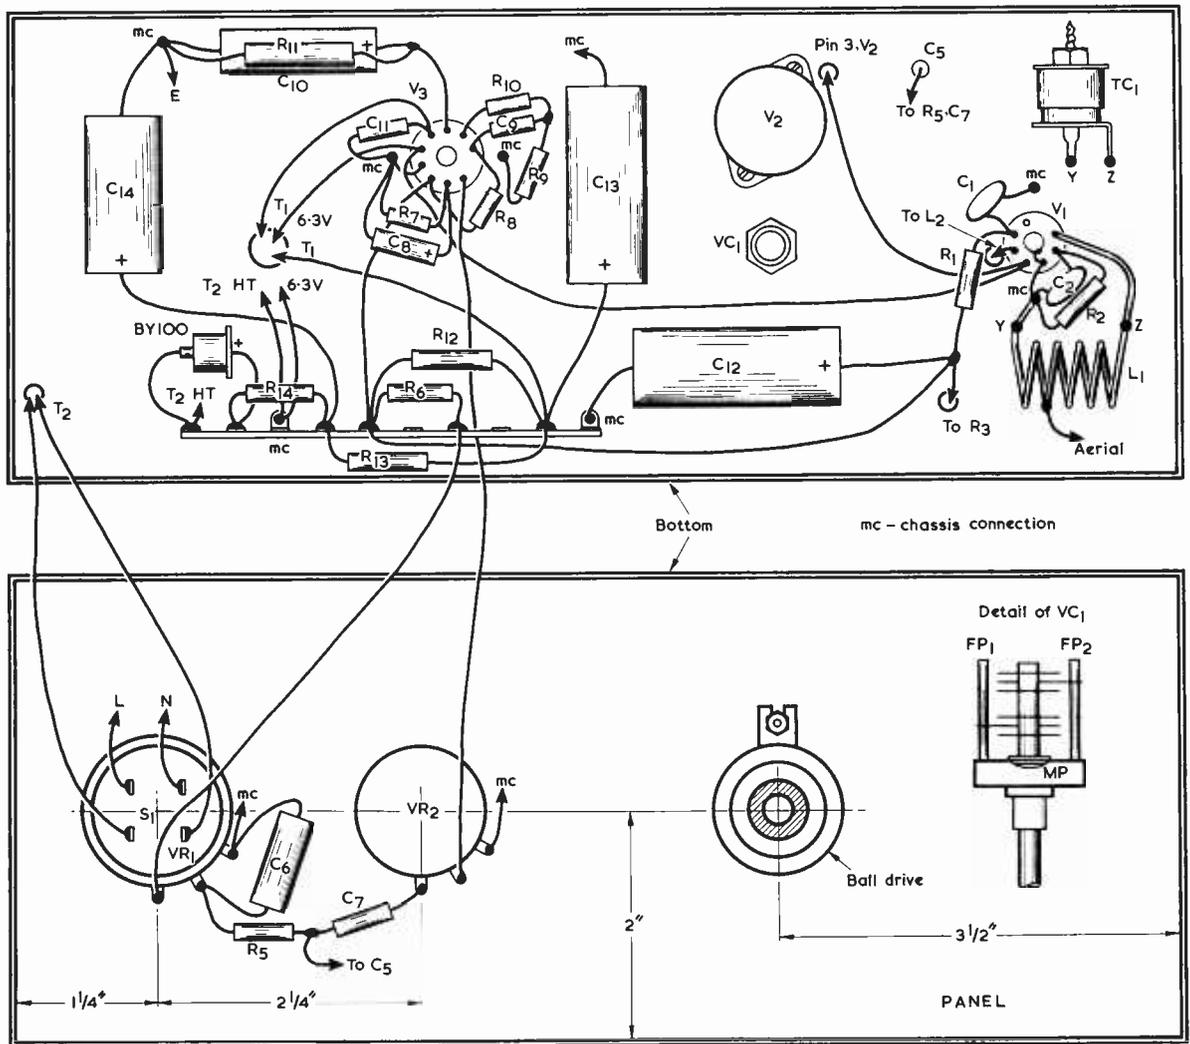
The front of the chassis member and the back of the front panel. Also shown is a detail of VC1, illustrating the manner in which this component is made up
